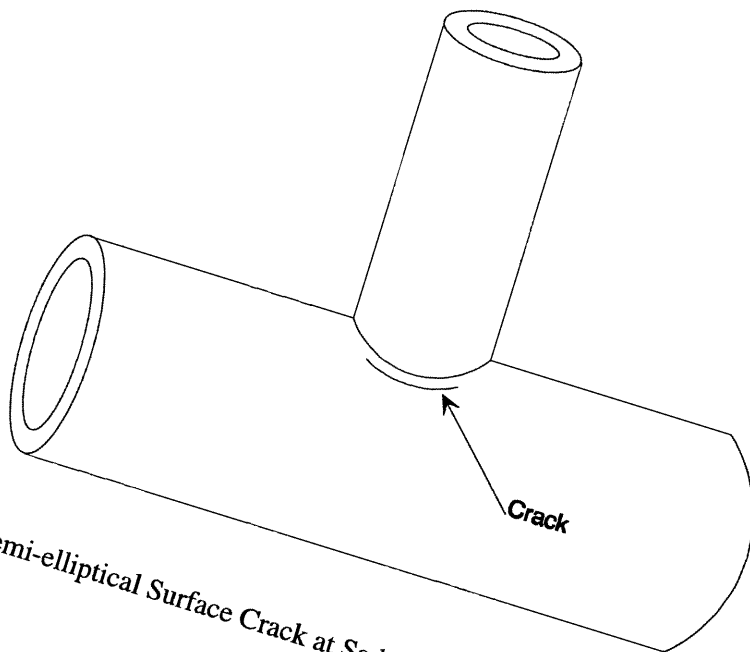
Semi-elliptical Surface Crack at Saddle Position of Tubular Welded Joint
